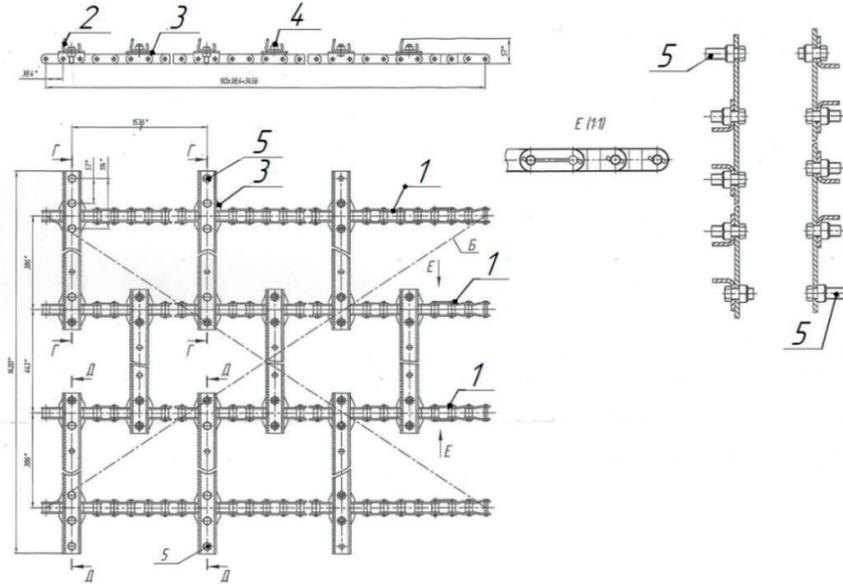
Chain-slat conveyor: 1 - conveyor chain; 2 - stamped bar; 3 - mounting plate; 4 - bolted connection; 5 - pin
